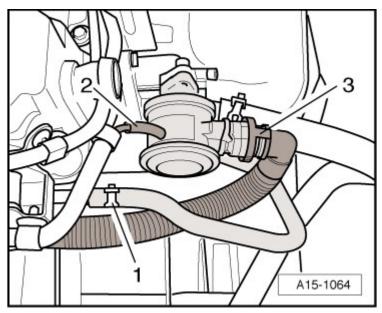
Identifying Coolant Pipe And Thermostat Housing Courtesy of AUDI OF AMERICA, LLC
